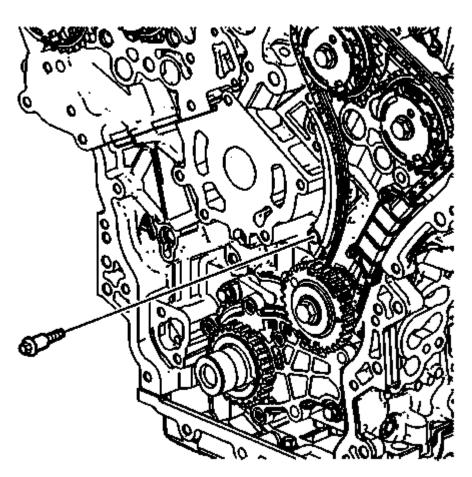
Identifying Secondary Camshaft Drive Chain Shoe Bolt Courtesy of GENERAL MOTORS COMPANY
